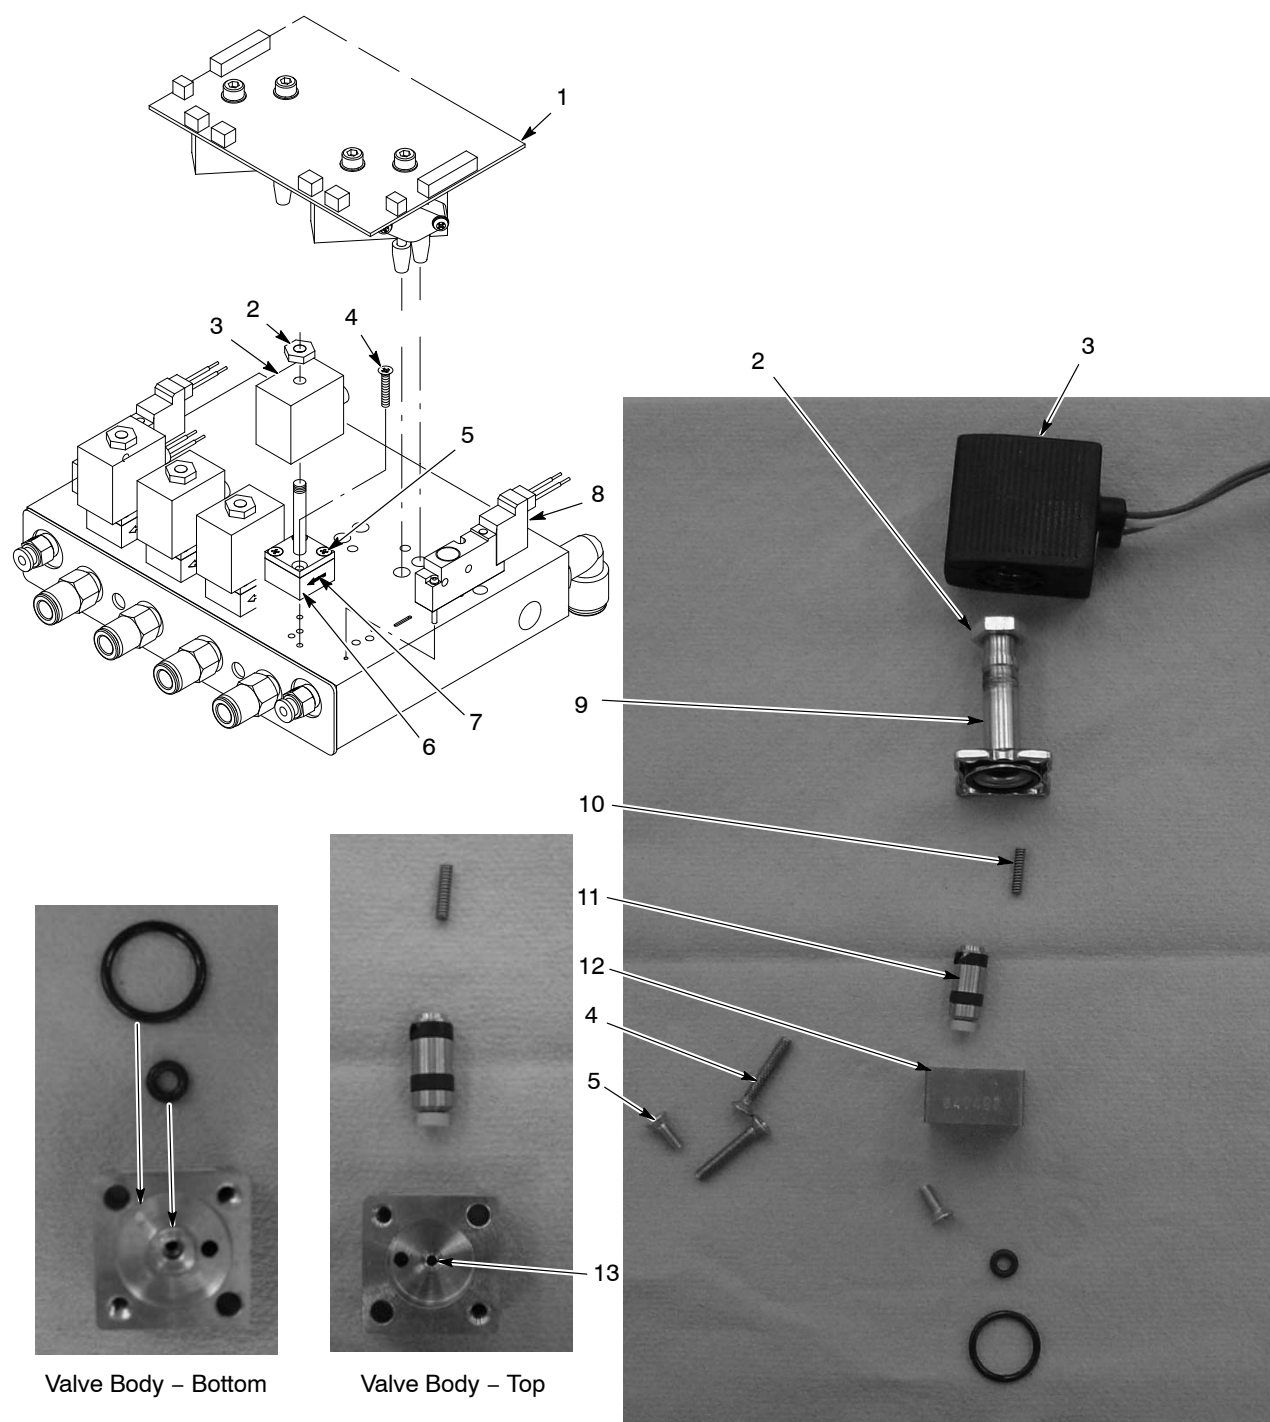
iFlow Module Proportional Valve Removal and Replacement
